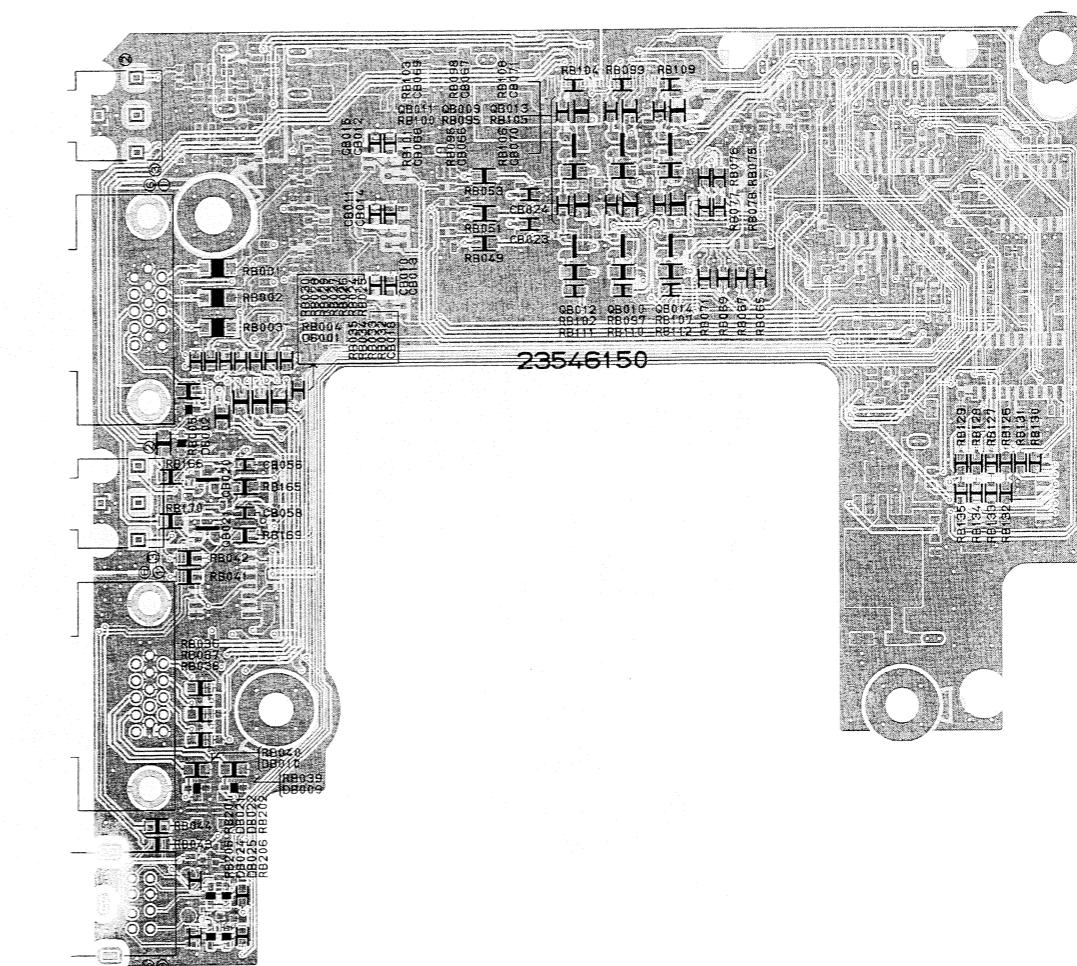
U0021 RGB PC Board (Bottom Side)
